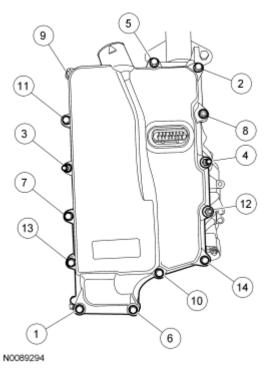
Main Control Cover Bolts Tightening Sequence Courtesy of FORD MOTOR CO.
